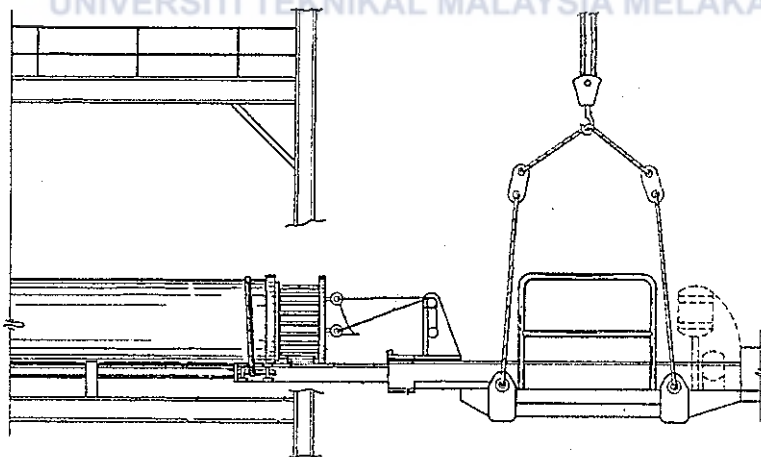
Design of tube bundle (Krajicek & Cradeur,1991)
